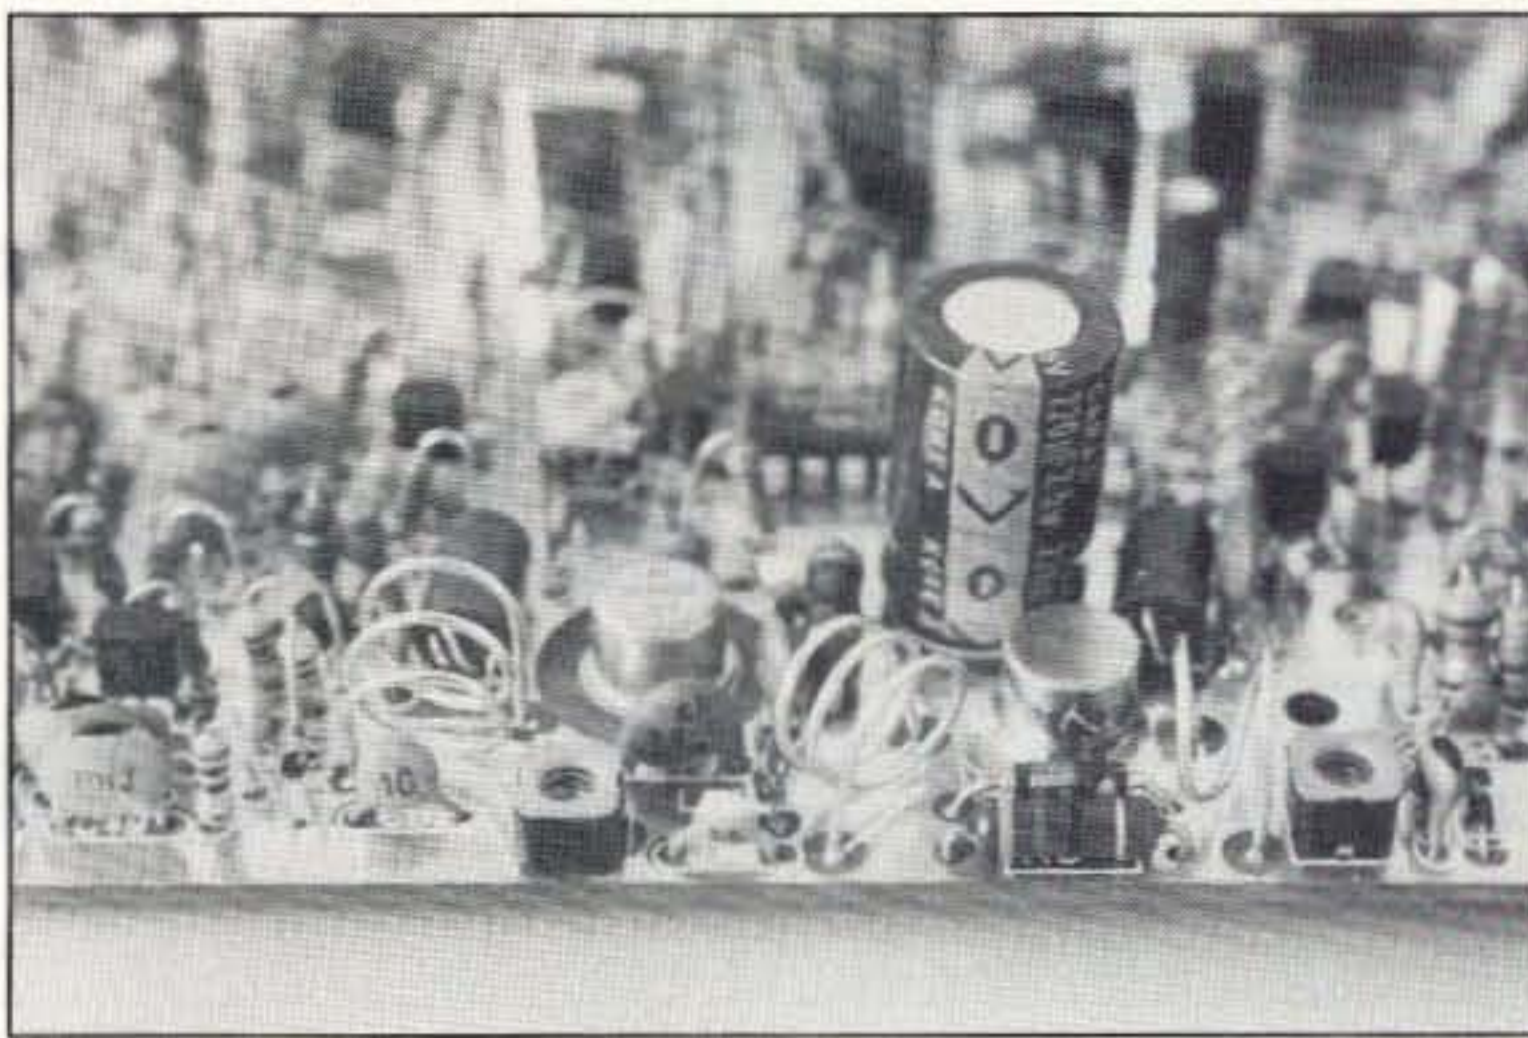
Photo D. Close-up of the final amplifier assembly, showing the trimmers and output coils.
